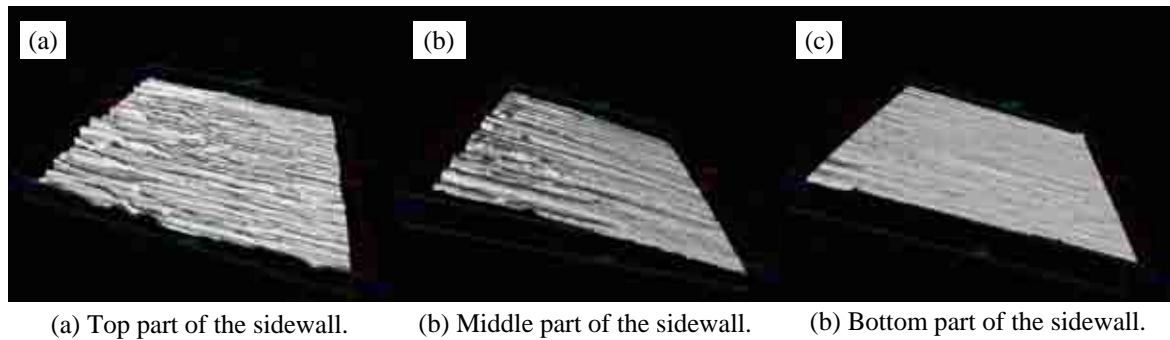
3D constructed surface texture at the top, middle and the bottom parts of the silicon mould using stereo imaging fabricated using DRIE Bosch process.
